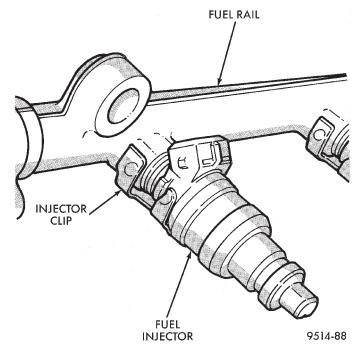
Fuel Injector Clip—2.5L Engine REMOVAL
